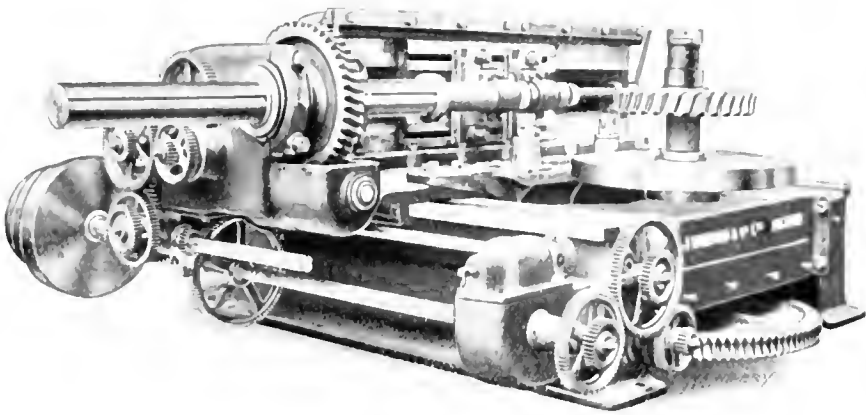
The Holroyd Worm Gear Generating Machine using a Fly Tool or Taper Hob.
